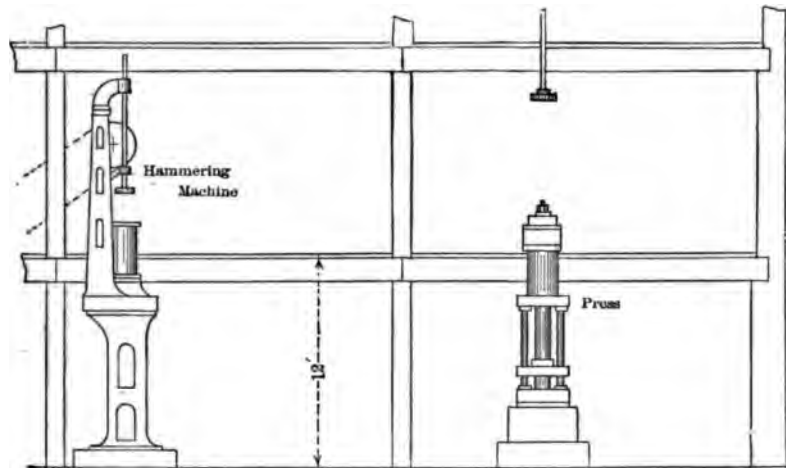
ARRANGEMENT OF HYDRAULIC MACHINES FOR MAKING RETORTS.
